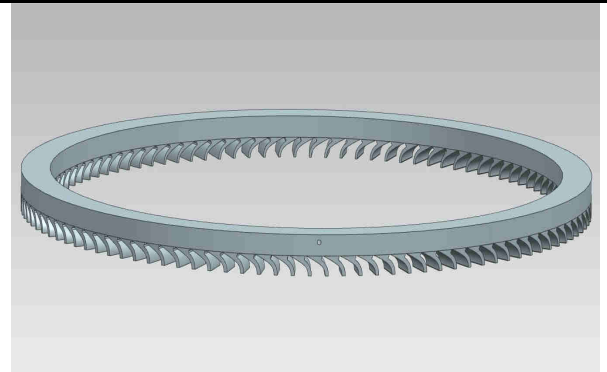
Electrode C for machining Asymmetric blade of LPOT turbine rotor
